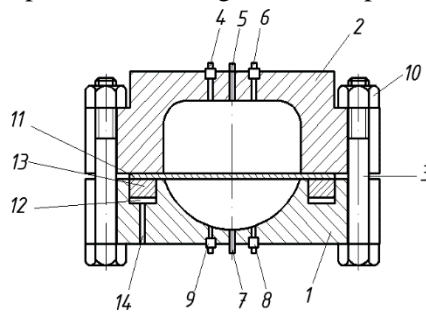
Diagram of gas stamping device: 1 - matrix; 2 - combustion chamber; 3 - bolt; 4,8 - inlet valves; 5,7 - spark plugs; 6,9 - exhaust valves; 10 - nut; 11 – blank part; 12 - cavity; 13 - annular piston; 14 - channel
